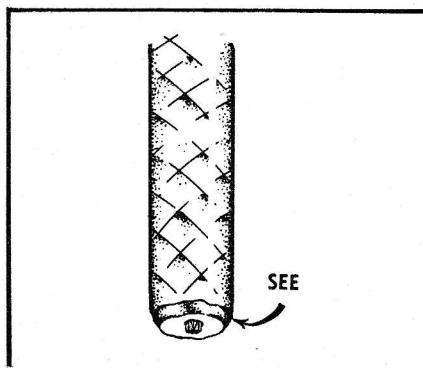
Making a slight chamfer like this will allow the new cable to be pushed into the coil easily. A little bit of lubrication will make it easier still.
